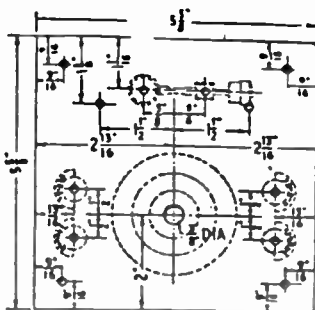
COMPLETE DRILLING LAYOUT FOR PANEL OF CRYSTAL RECEIVER. THE LOCATION OF PARTS AND BINDING POSTS IS INDICATED BY DOTTED LINES. PANEL MAY BE MADE OF CIGAR-BOX WOOD PAINTED WITH SHELLAC, OR BETTER STILL BAKELITE OR HARD RUBBER. ALL HOLES $\frac{3}{16}$ DIA. UNLESS OTHERWISE SPECIFIED IN DRAWING.
